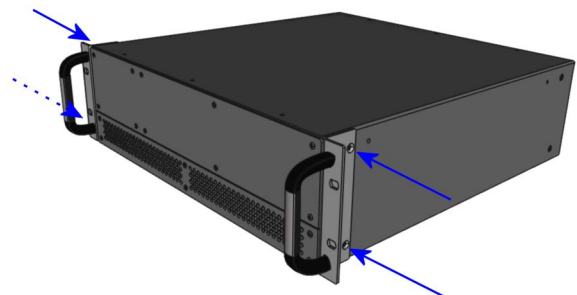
Mounting the 19" rack-mount kit to a DN6 chassis
